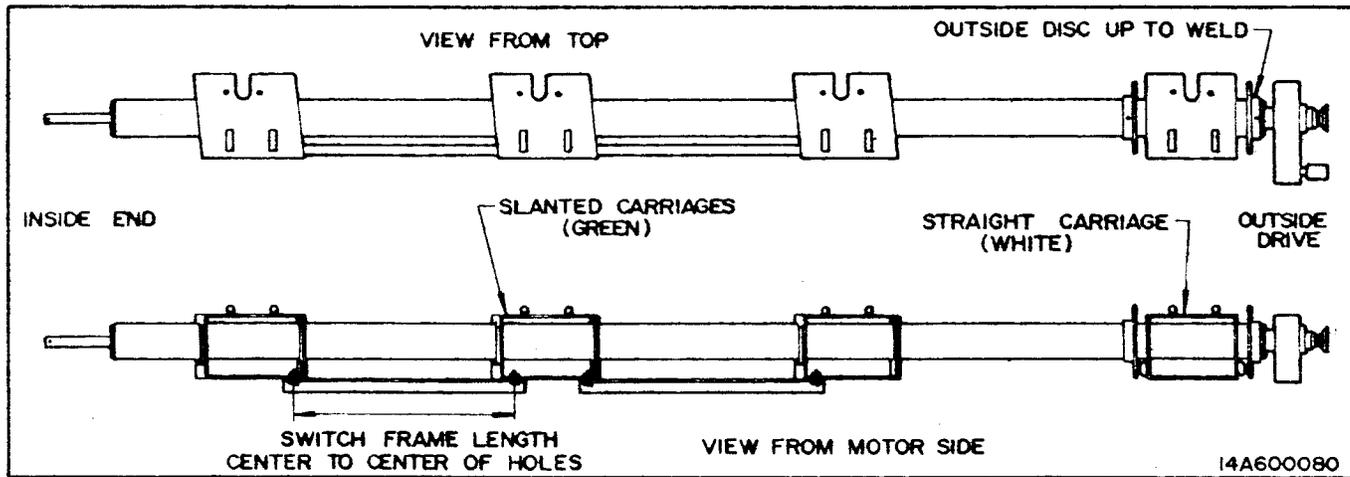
SWITCH FRAMES - OUTSIDE CARRIAGE
